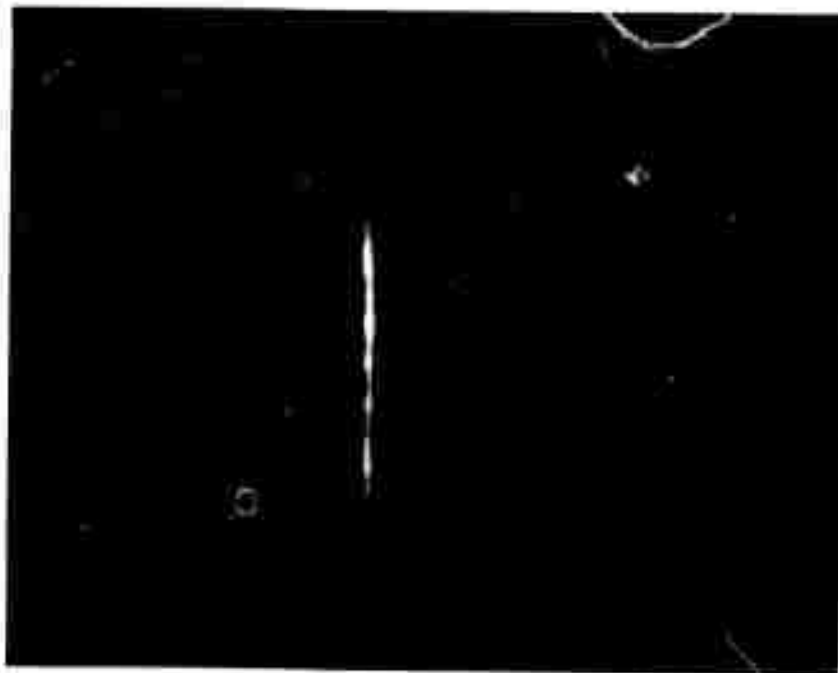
Enlarged Reconstructed Image of Top Hole in 3-Hole Blank (see Figure 38e)
